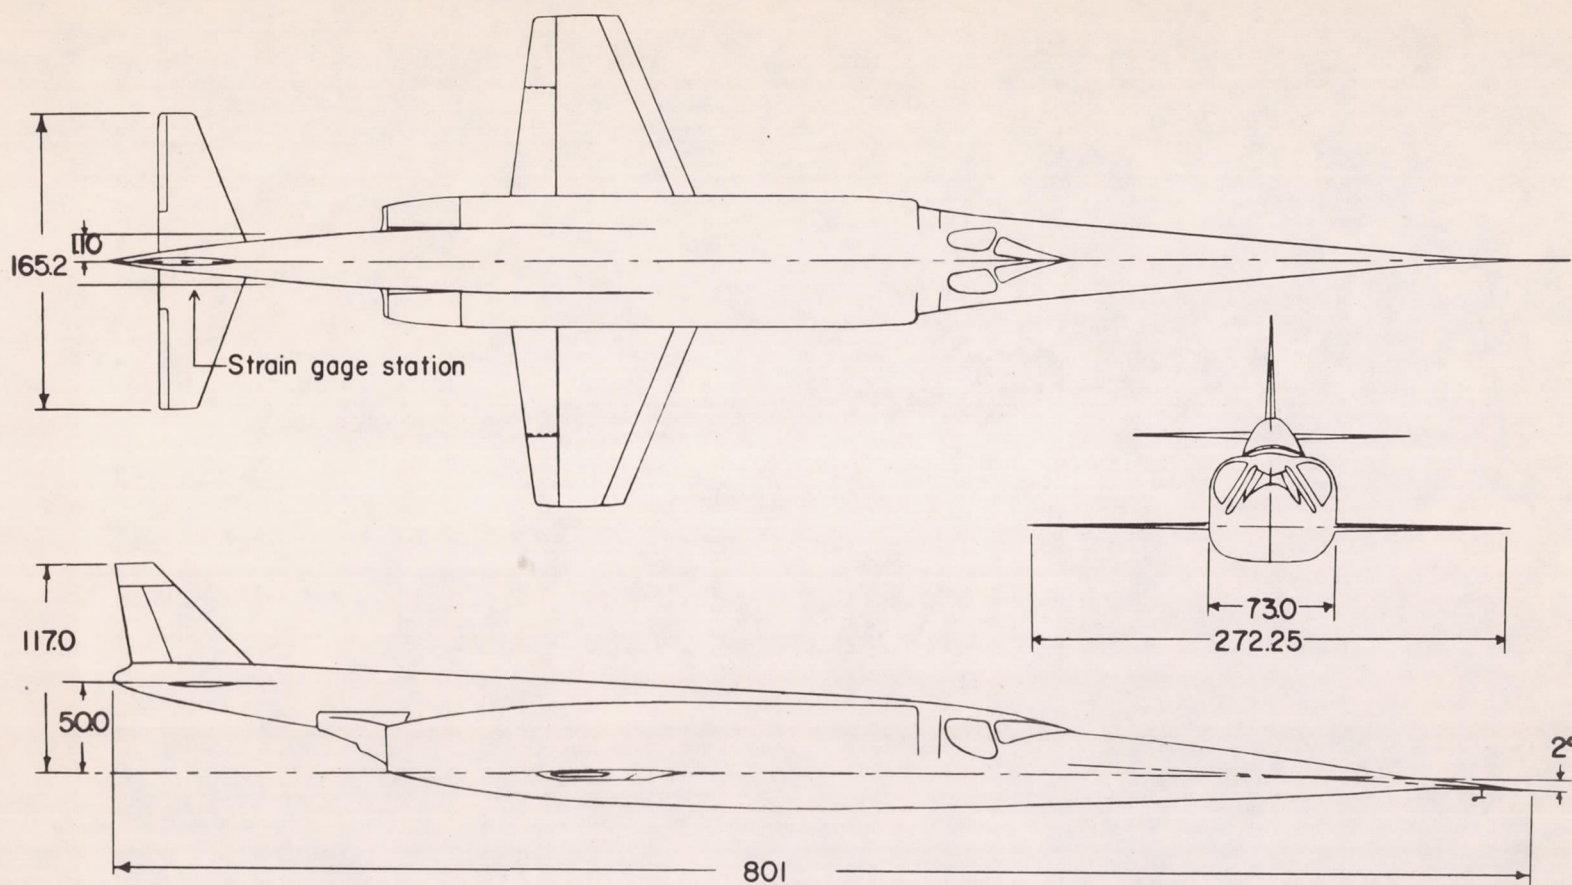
Three-view drawing of the X-3 airplane. All dimensions in inches.
